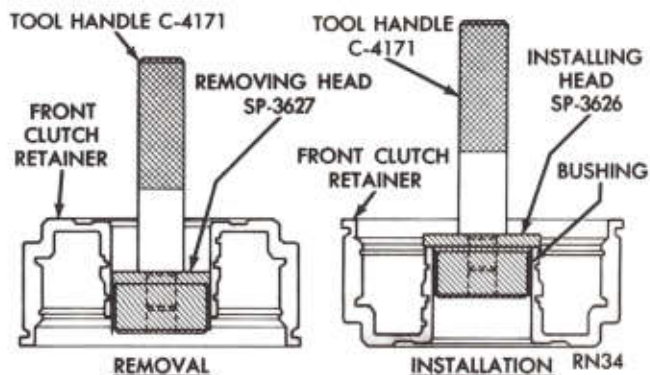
Replace Front Clutch Retainer Bushing (A-904T and A-999)
